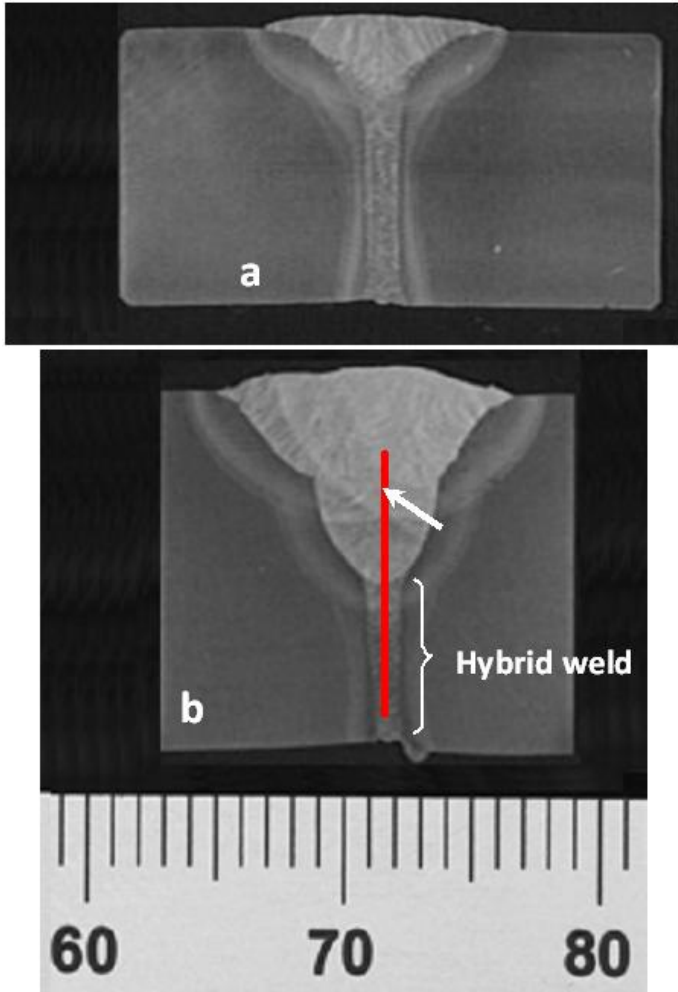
HLAW weld macros for (a) X80 and (b) X100 pipe.
